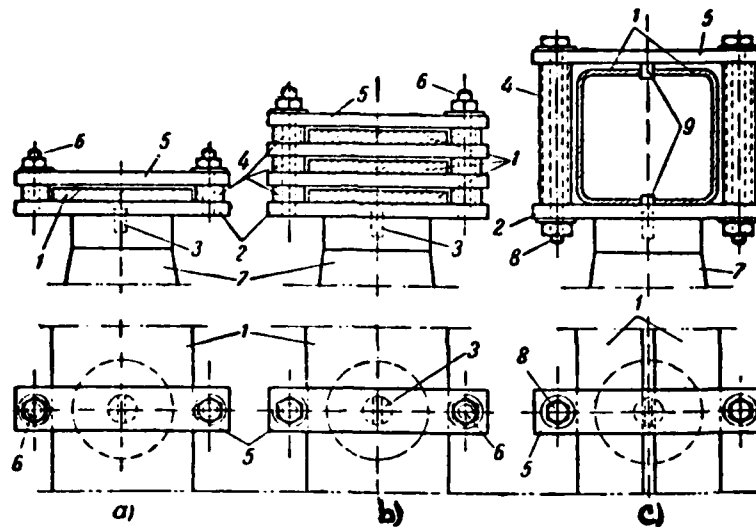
Attachment of aluminum busbars on stand-off insulators. a) the single-band busbar; b) packet of three bands; c) packet of two busbars of box section. 1 - busbar; 2 - steel plank; 3 - screw/propeller; 4 - distance steel tube; 5 - aluminum plank; 6 - pin, screwed into plank 2; 7 - insulator; 8 - bolt; 9 - spacer.
